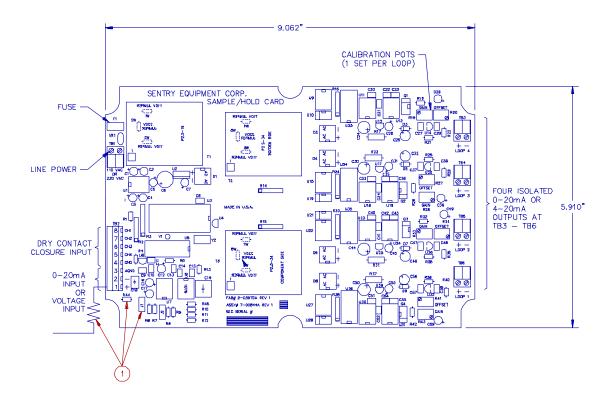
Configuring Remote Track & Hold Board for Voltage Input
